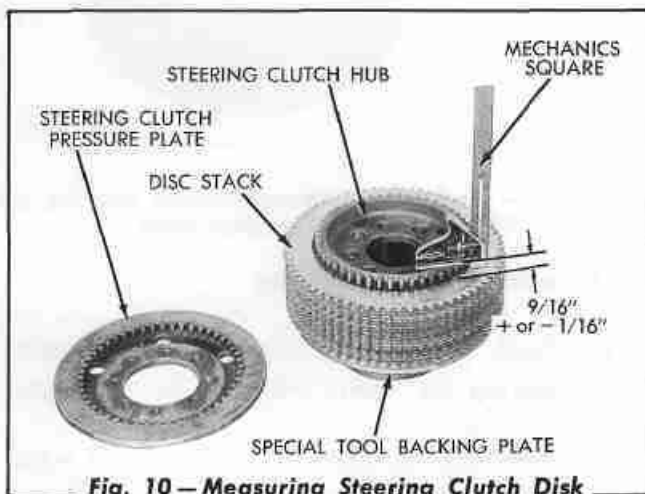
Measuring Steering Clutch Disk Stack Height
